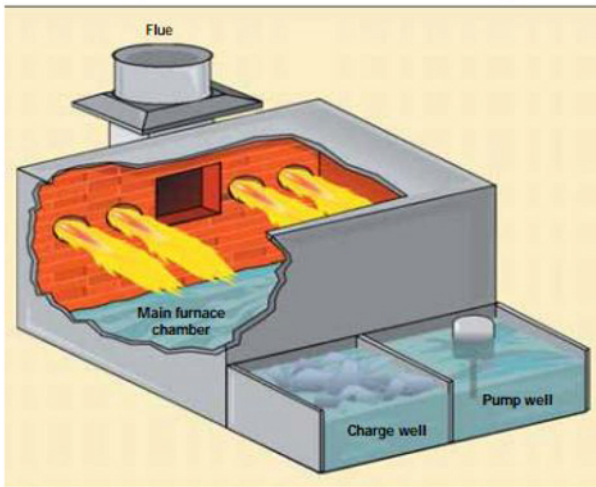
Basic sidewell reverberatory melting furnace. During charging, molten aluminum is pumped through the charge well, where it melts scrap and then circulates back into the main furnace chamber for reheating [4].
